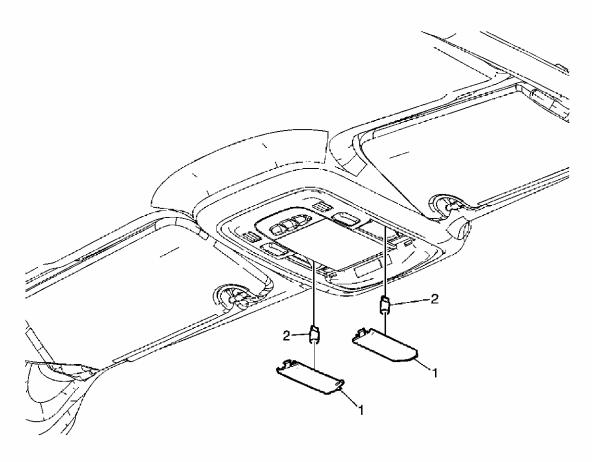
View Of Overhead Console Reading Lamp and Bulbs Courtesy of GENERAL MOTORS CORP.
